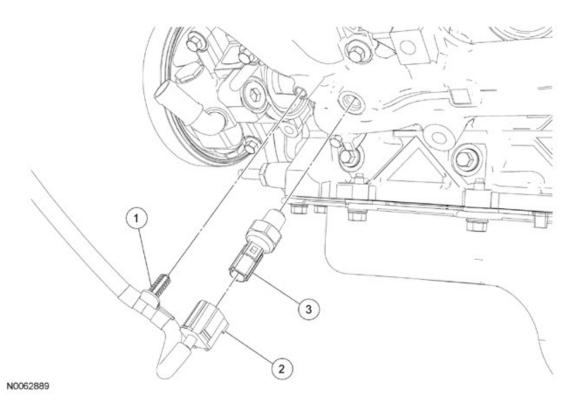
Identifying Engine Oil Pressure Switch Wiring Harness Retainer, Electrical Connector And Switch
